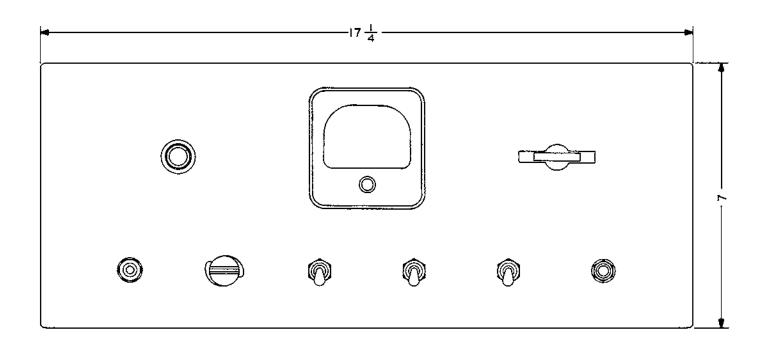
Type 177L-1 Remote Control Unit Outline and Mounting Dimensions
